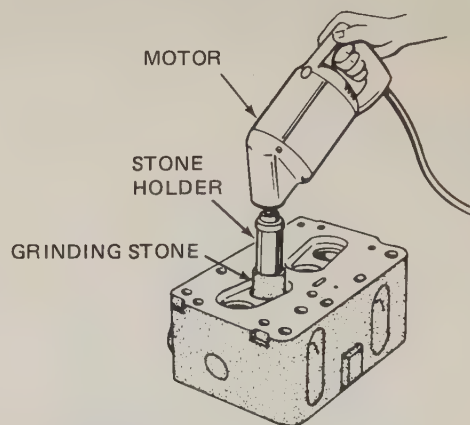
Grinding a valve seat. (The J. I. Case Company)
